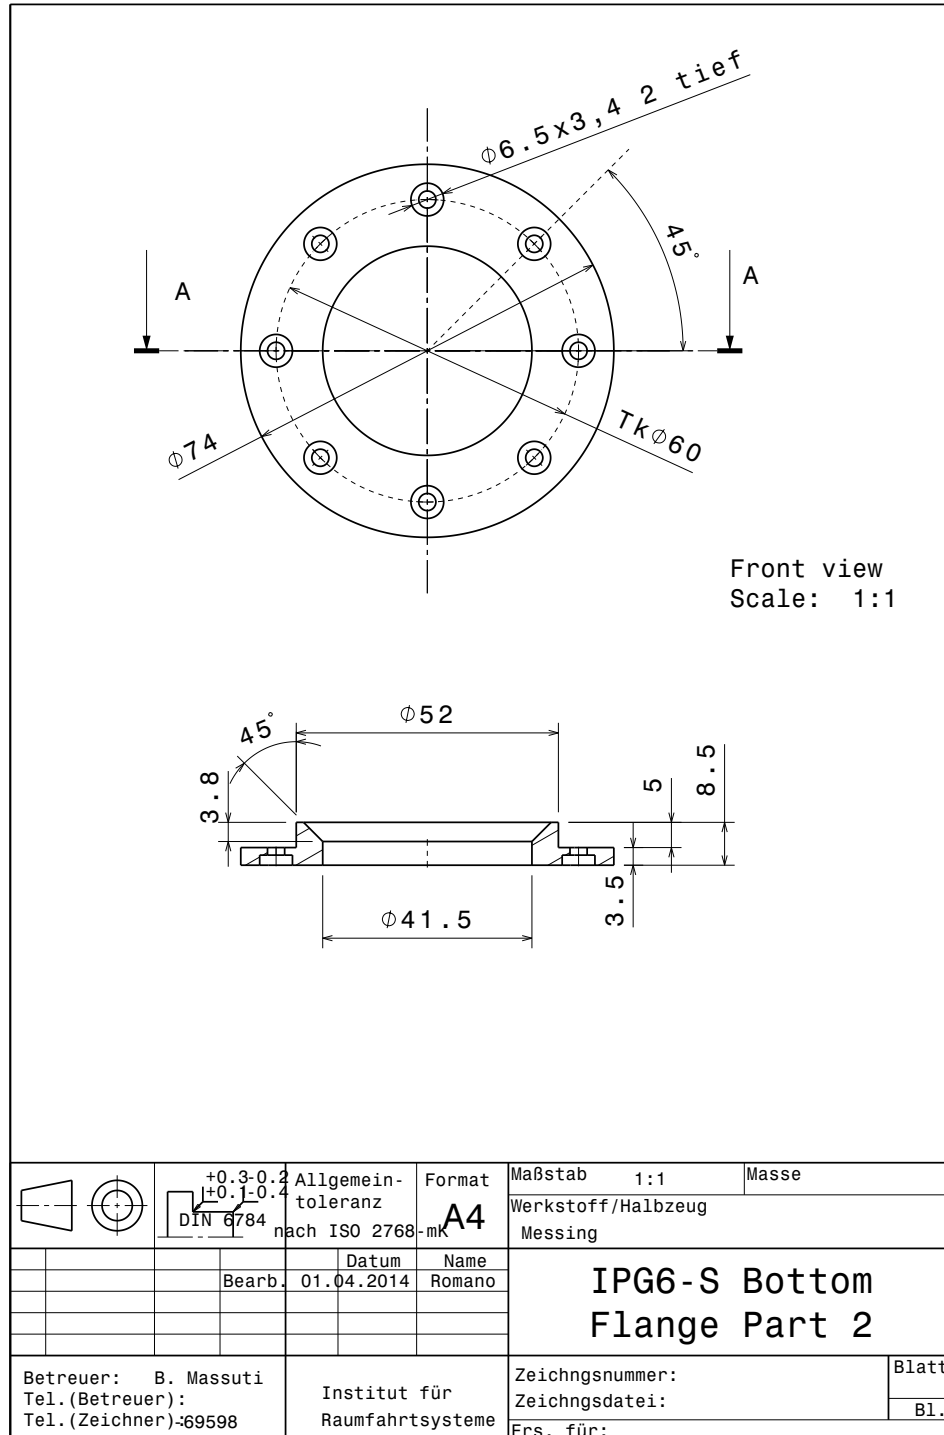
Closure of the Water Cooled Bottom Flange.
